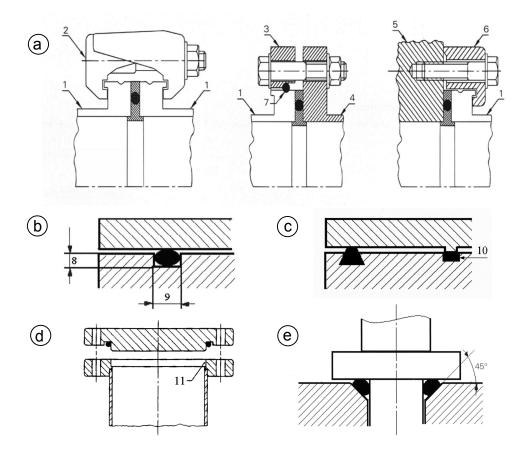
Examples of elastomer seals. a - ISO seals with centered O-ring and clamps (left), fixed to rotatable flange with collar (middle) or bolted vacuum wall to rotatable flange with collar (right), b - seal with rectangular O-ring groove, c - seal with closed dovetail groove for positive retention of the O-ring (used in load-lock doors, etc.), d - self-centering flange system, e - seal with O-ring in corner position. 1 - rotatable ISO flanges, 2 - clamp, 3 - collar, 4 - fixed flange, 5 - vacuum wall, 6 - collar, 7 - circular clip, 8,9 - width and depth of rectangular O-ring groove (see table 9.2), 10 - spacer, 11 - centering edge.
